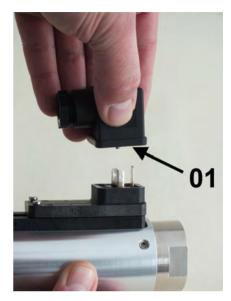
Remove socket 2. Remove socket (Fig. 21/01).
